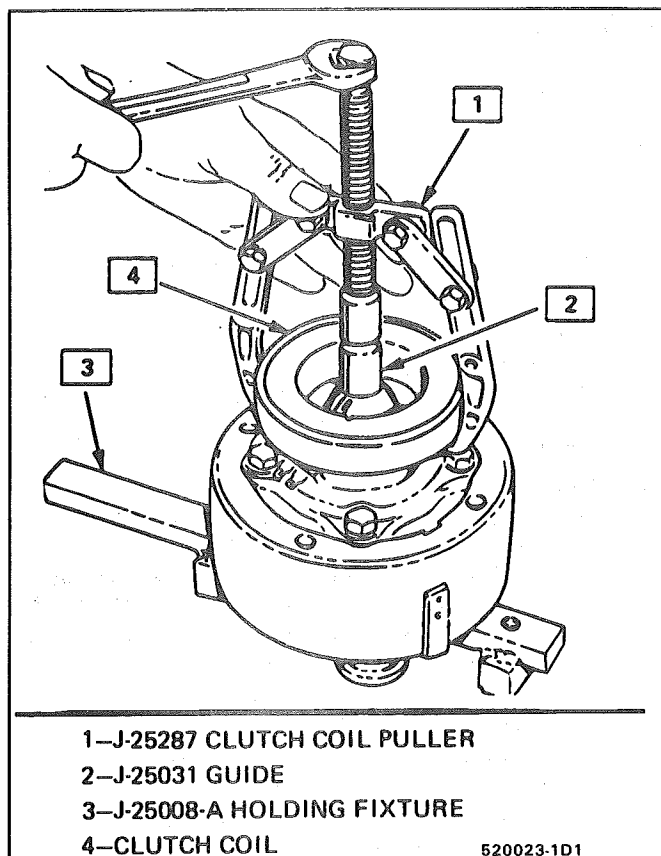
Removing Poly-Groove Clutch Coil (Optional Method)
